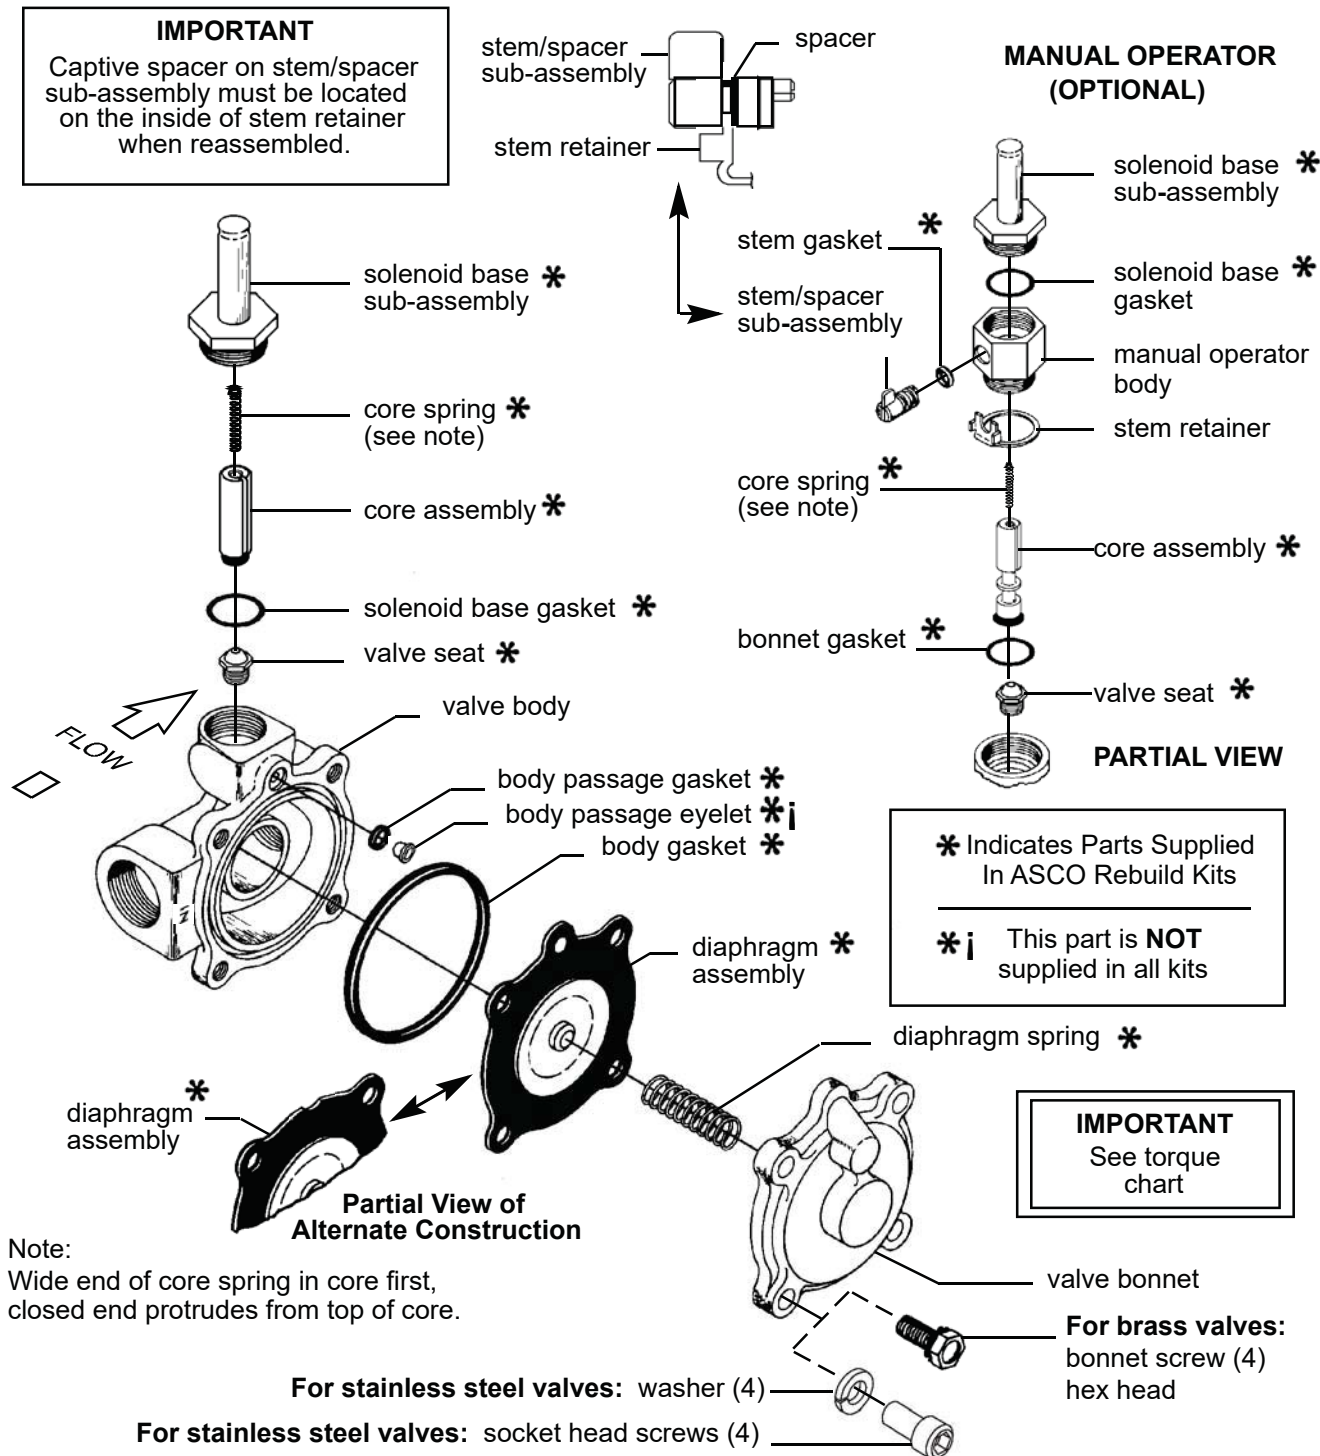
Series 8210 valve without solenoid, AC construction with 1 or 1 1/4" NPT valve body shown.
